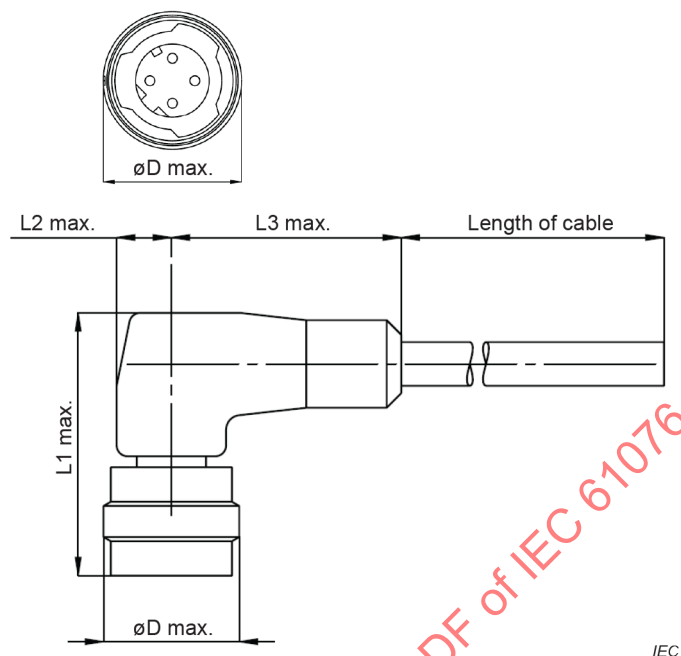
Style MF_M12_PPI – Non-rewireable connector, with female contacts, right-angled version, with inner push-pull and screw locking
